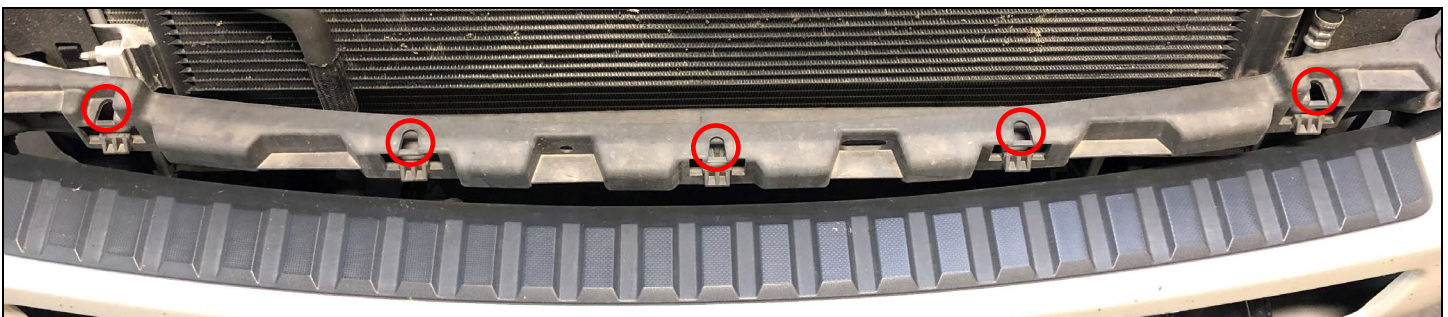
Lower Grille Retention Clip Locations (grille removed for clarification)
